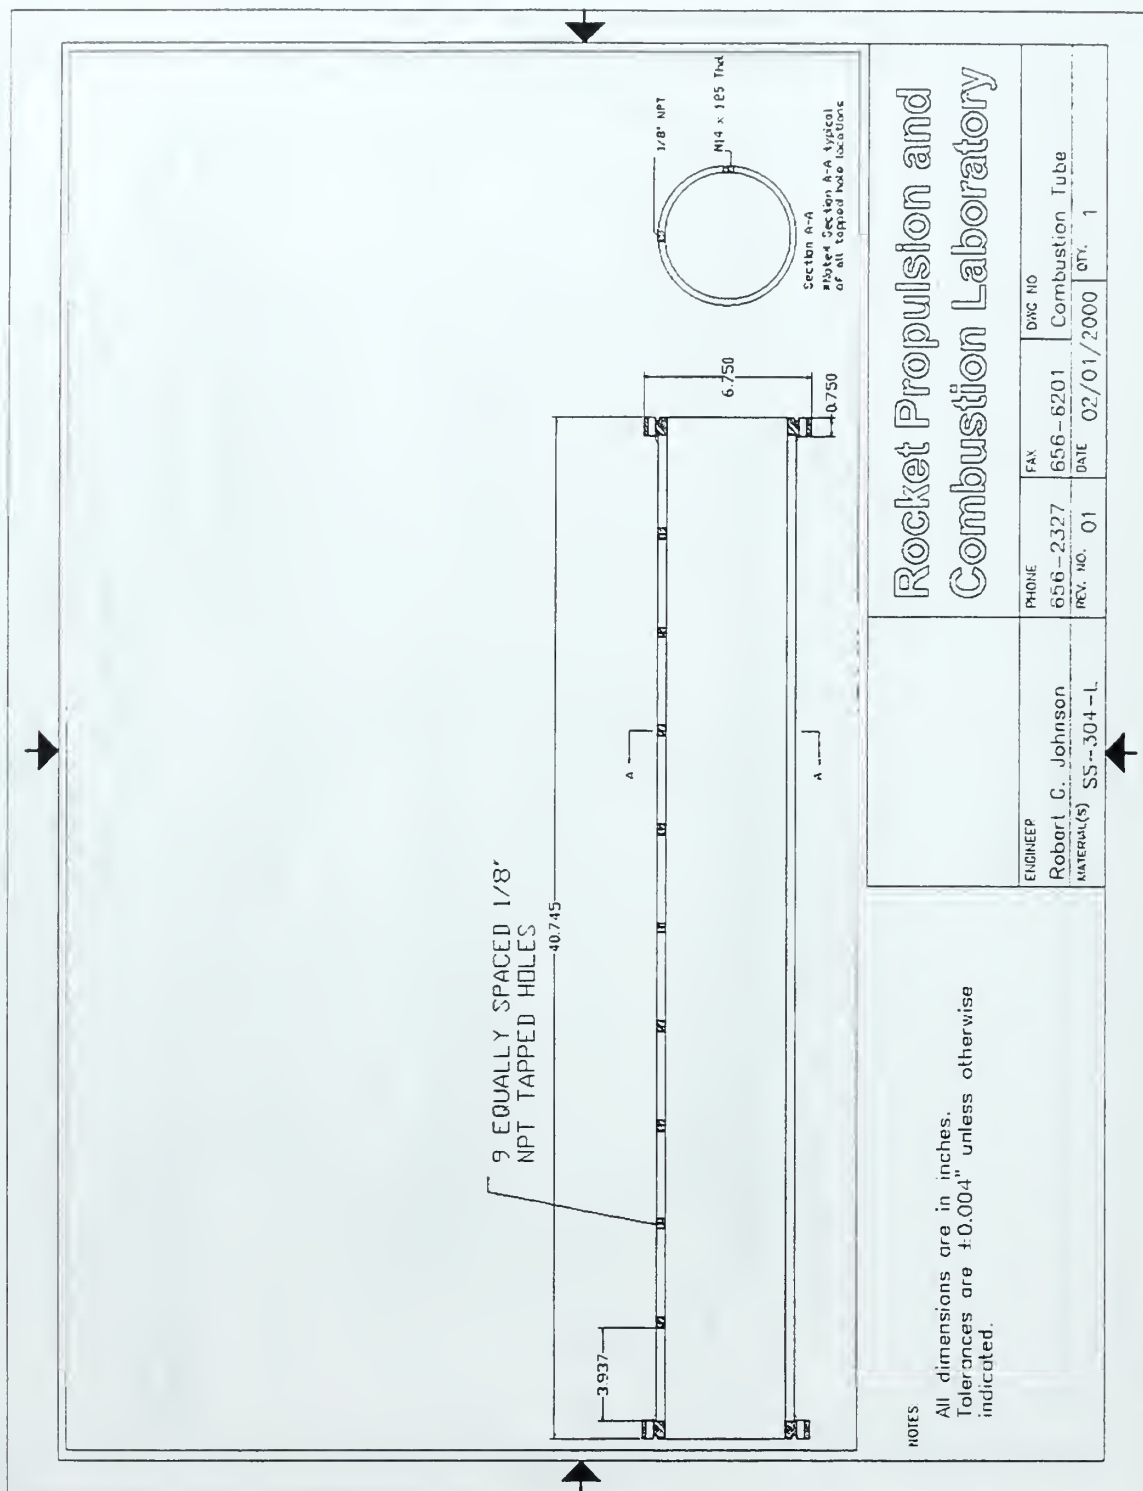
A depiction of the main combustion tube with its end flanges welded in place.
